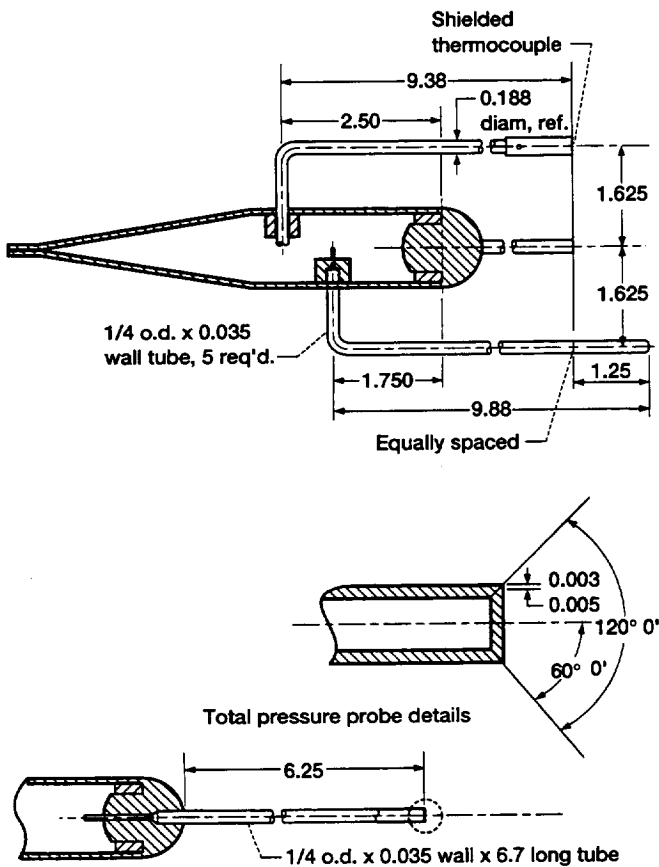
Cross section of diffuser survey rakes showing probe details. Rake thickness = 1.25; Chord = 7.53. (All dimensions in inches.)
